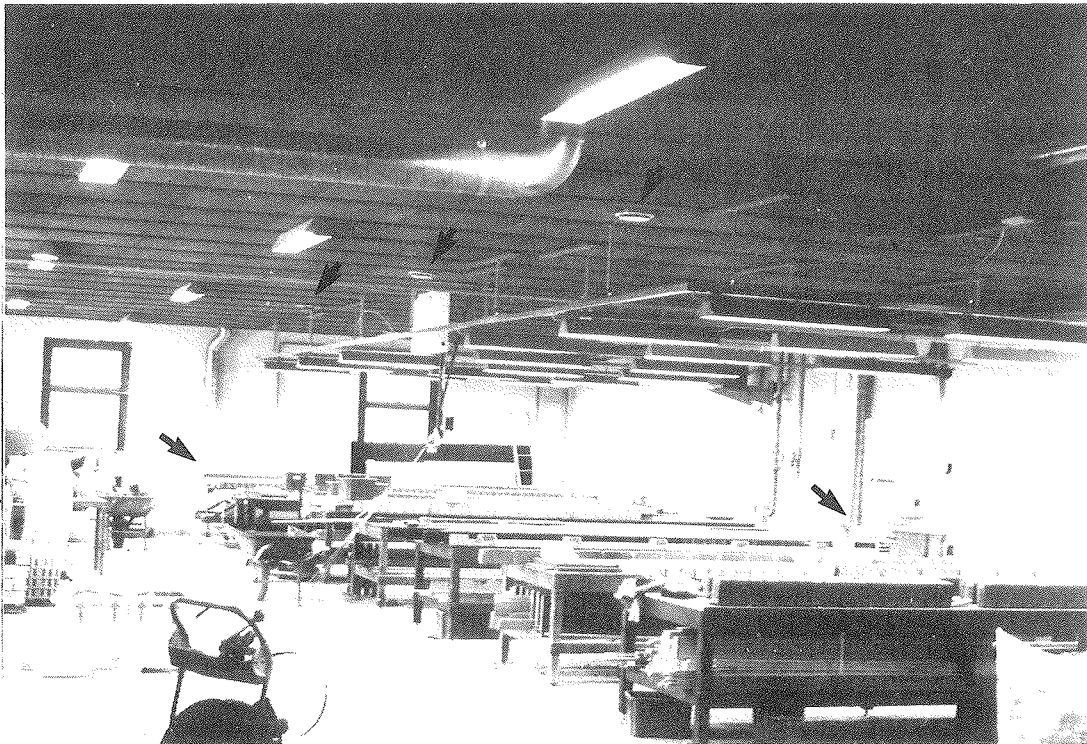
Room 1 with the working tables for manufacturing of special-purpose brick beams and bricks.
